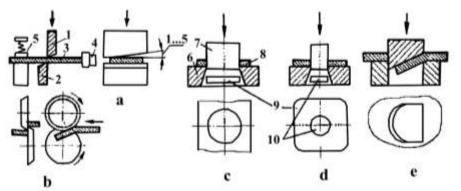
Separating operations of sheet stamping: a-cutting by guillotine shears; b-cutting by circle shears; c-blanking; d-piercing; e-notching; 1 – upper knife; 2 – lower knife; 3, 8 – billet; 4 – size restrict; 5 –fixer; 6 – lower die; 7 – upper die; 9 – part (stamping); 10 – waste
